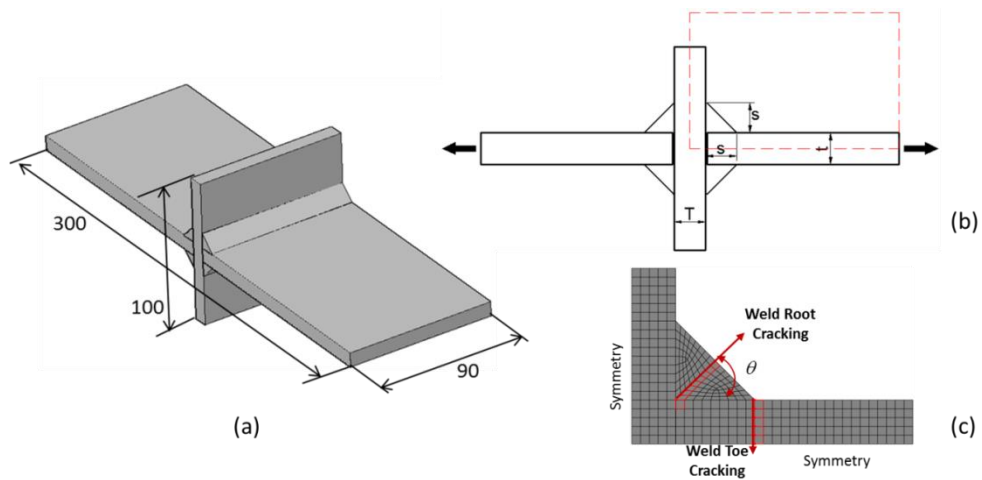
Load-carrying cruciform fillet specimen geometry: (a) 3D view; (b) 2D cross section; (c) 2D FE model taking advantage of quarter-symmetries
